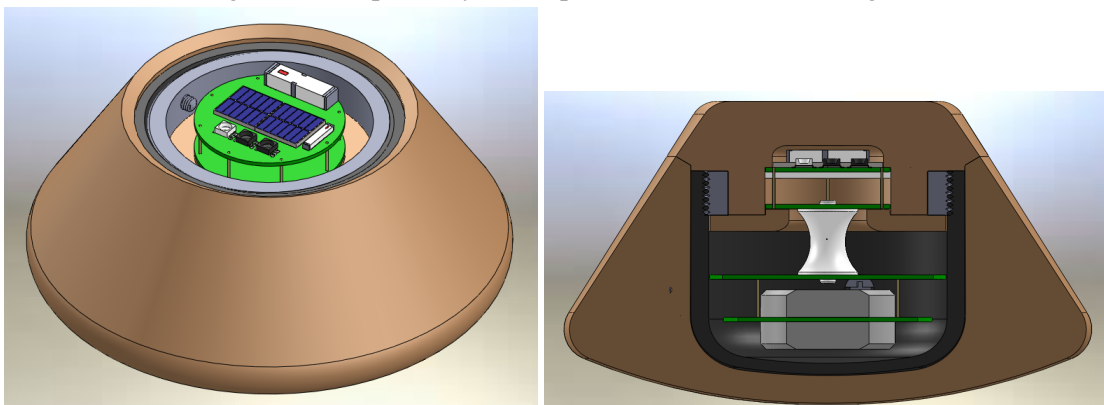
Capsule layout - Cover Detached(left); Transversal view (right)
